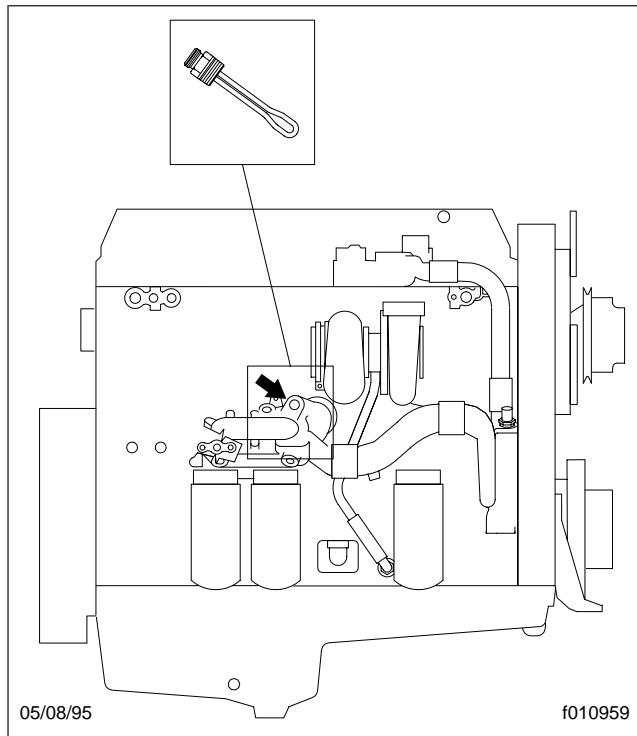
, Block Heater Element Installation (Detroit Diesel Series 60 engine)
